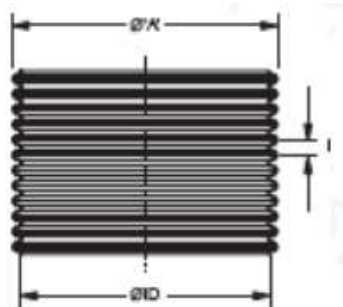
EZIPIT® PP 1000 SINGLE WALL CORRUGATED RISER
